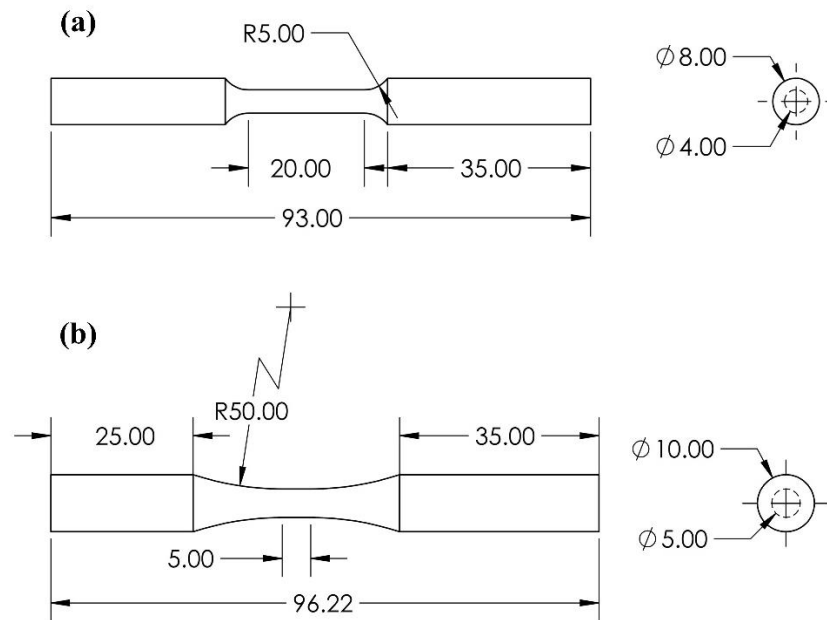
Geometry and dimensions (in mm) of the fabricated specimens; (a) tensile specimen and (b) fatigue specimen.
